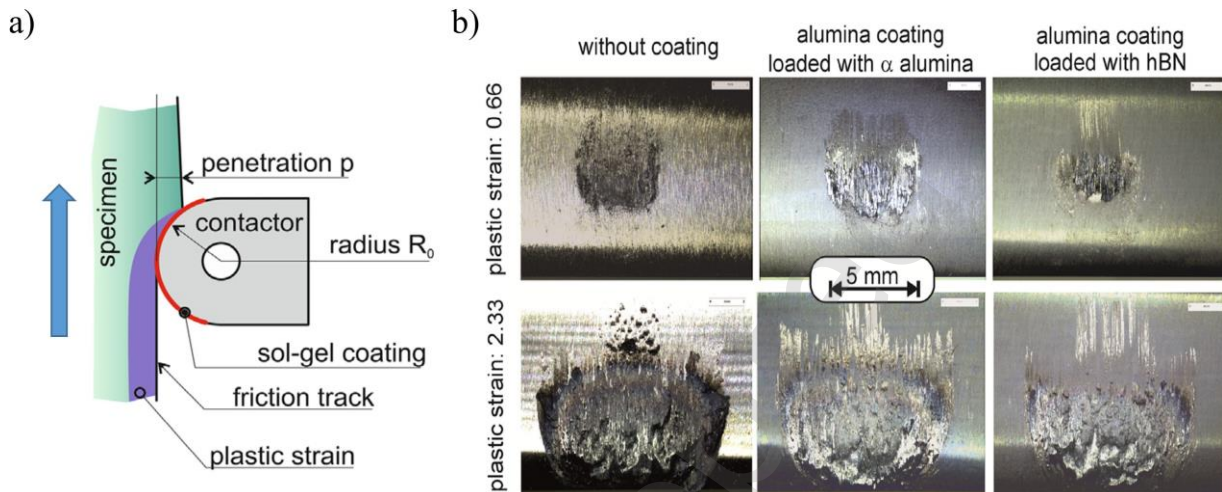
a) Section view of the contact zone in the warm and hot upsetting sliding test, and b) Friction mark on the contactor surfaces after one test without lubricant [72].
